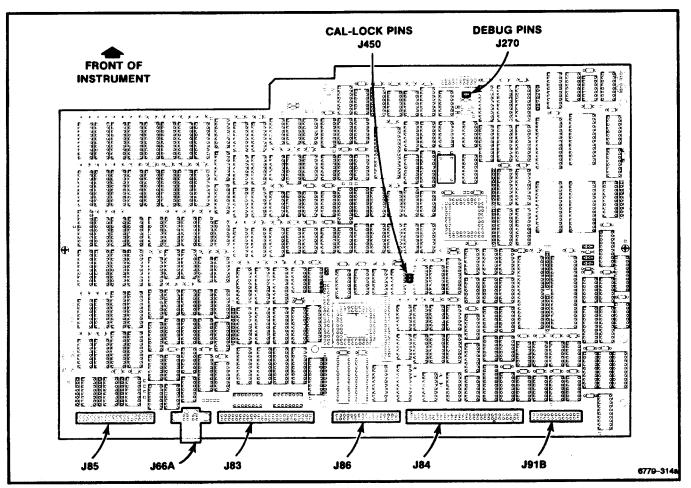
Connector locations for removal of the A6 Time Base board.
